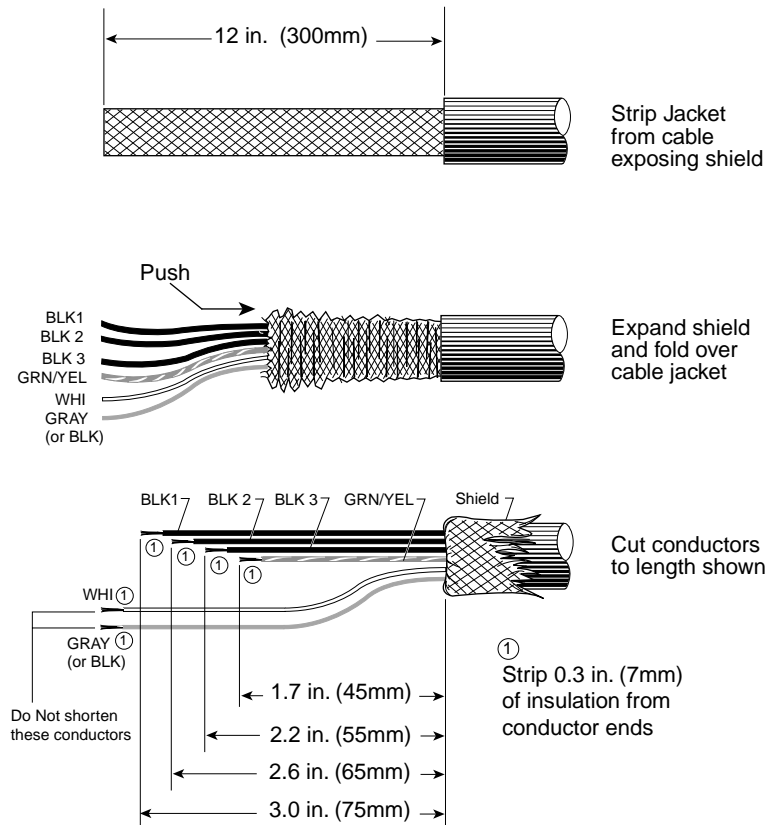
Preparing the motor cable termination—controller end (IP54 w/HBC)
